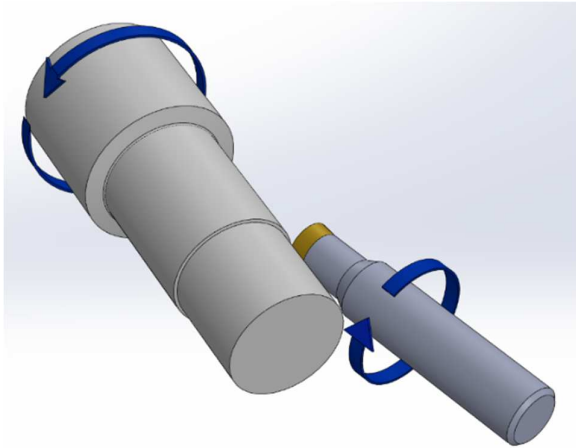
Unconventional cutting scheme with simultaneously tool and part rotating of a lathe machine
